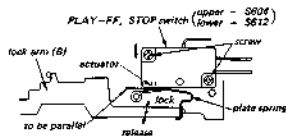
PLAY-FF, STOP switch (S604, 612) position adjustment
